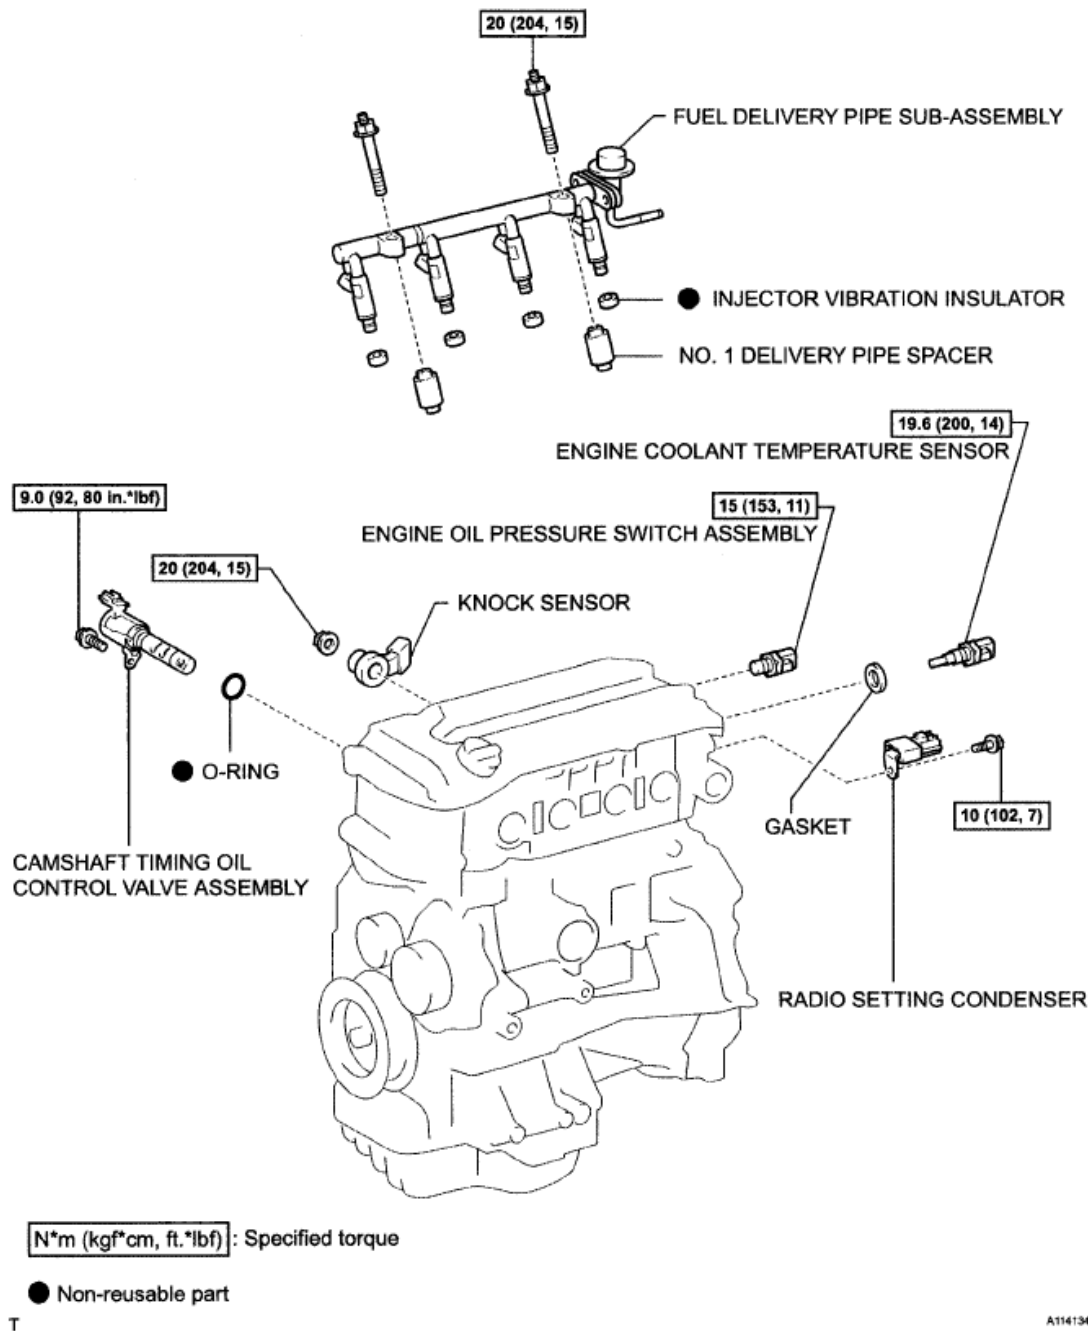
Identifying Engine Assembly Components With Specification (11 Of 11)
